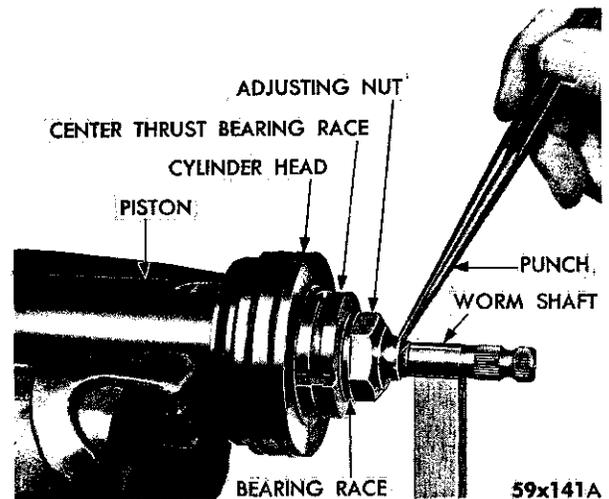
Staking the Worm Shaft Bearing Adjusting Nut
